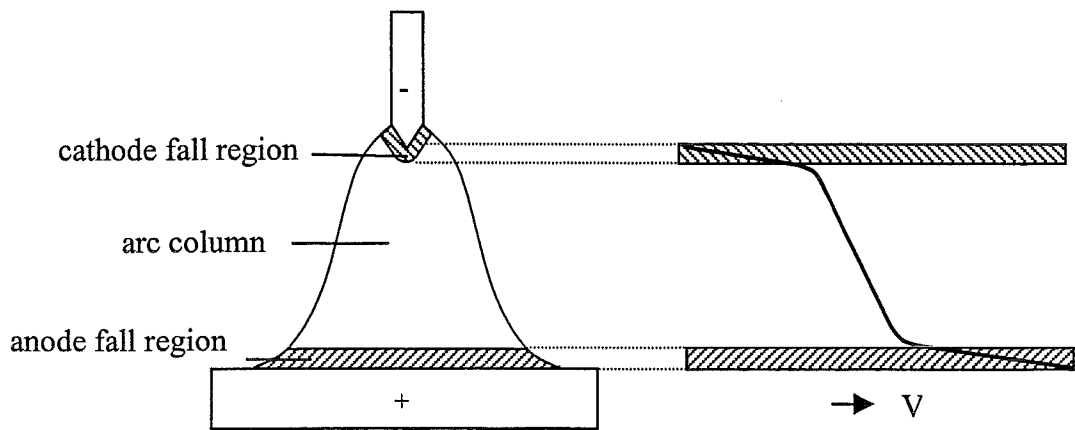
Welding arc with non-linear voltage path.
